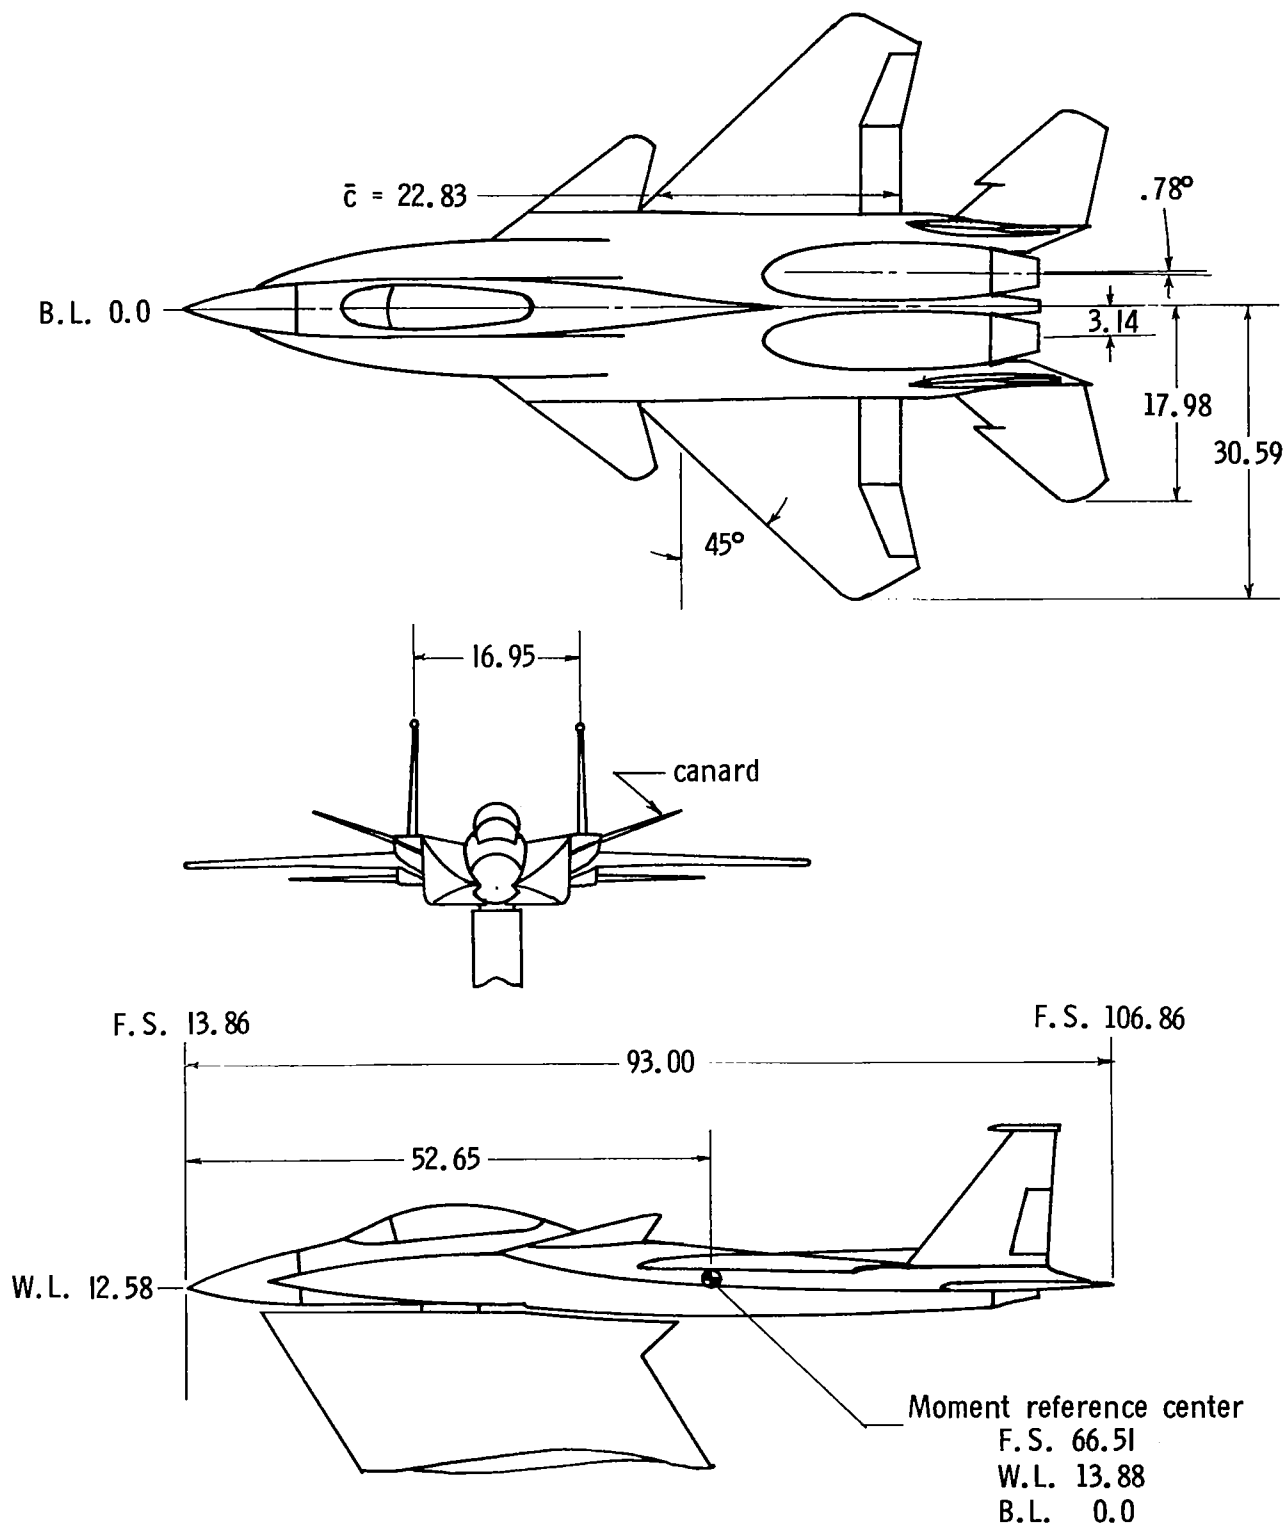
Sketch of 0.047-scale three-surface F-15 model. All dimensions are in centimeters unless otherwise noted.
